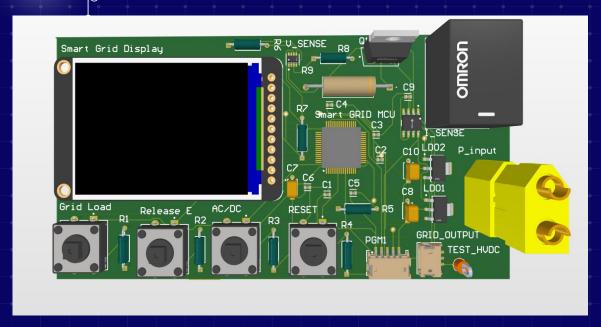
3D View of PCB Layout for our smart-grid PCB
